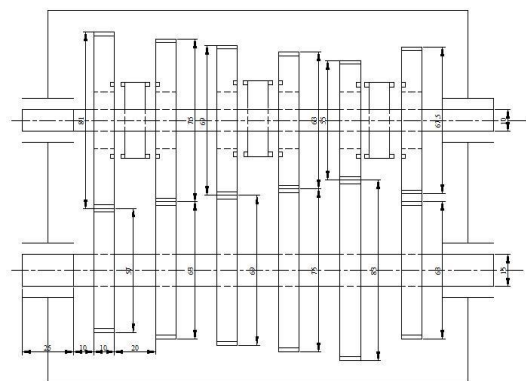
CAD Model of Six speed constant mesh Gearbox
